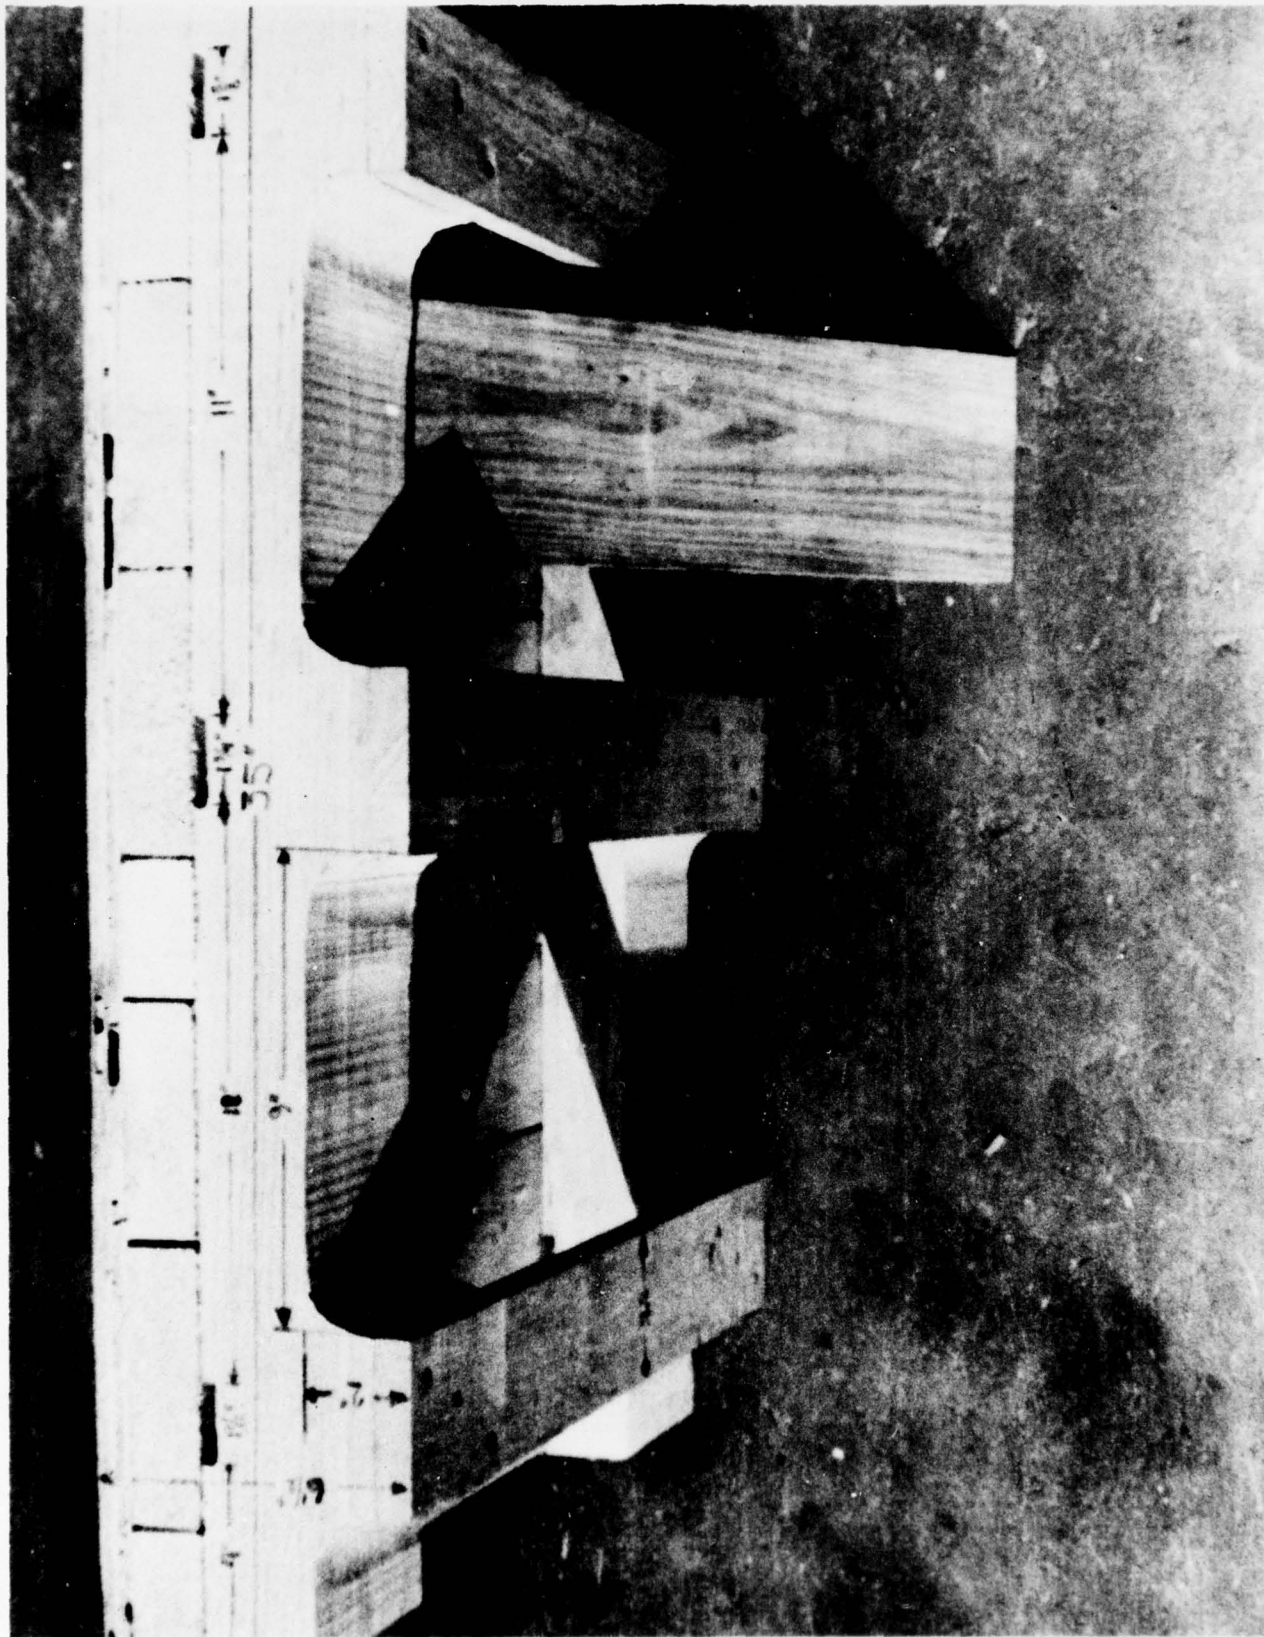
ARMY 155 mm UNIT LOAD BOTTOM ADAPTER DETAIL
